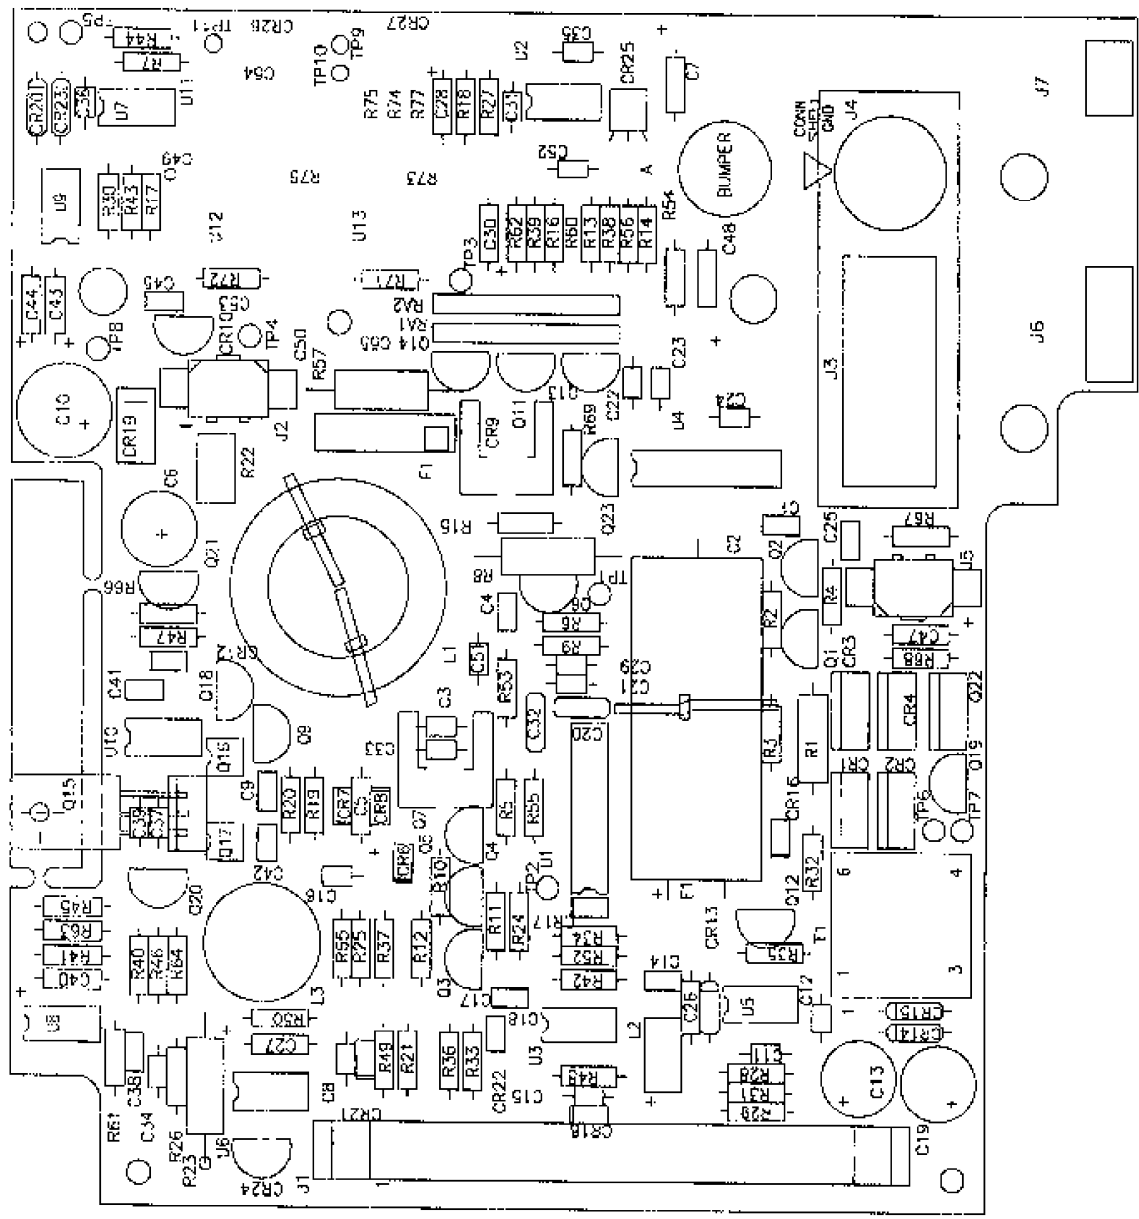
Parts Identification Power Supply CCA [v7.xx] PN 1310-5036-3
